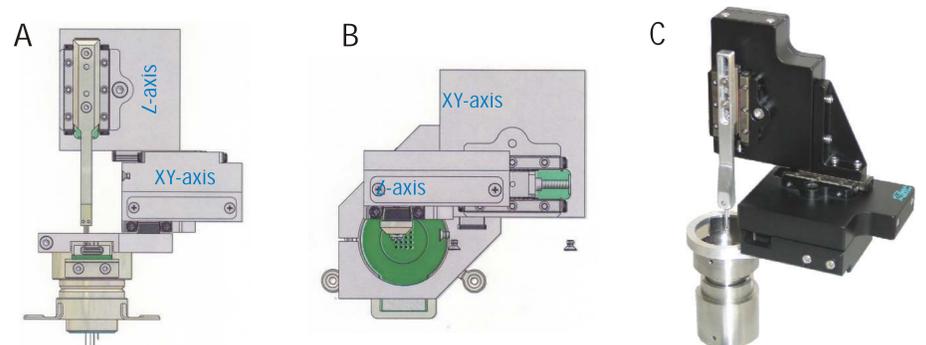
Overview drawing of the AEMP xyz-manipulator A) side view of the xyz manipulator mounted to the AEMP chamber insert. B) top view of the drawing in A). C) shows a photo of the motorized xyz-manipulator prototype that is able to reposition each of the 16 microelectrodes in two directions (up and down) along the z-axis.
